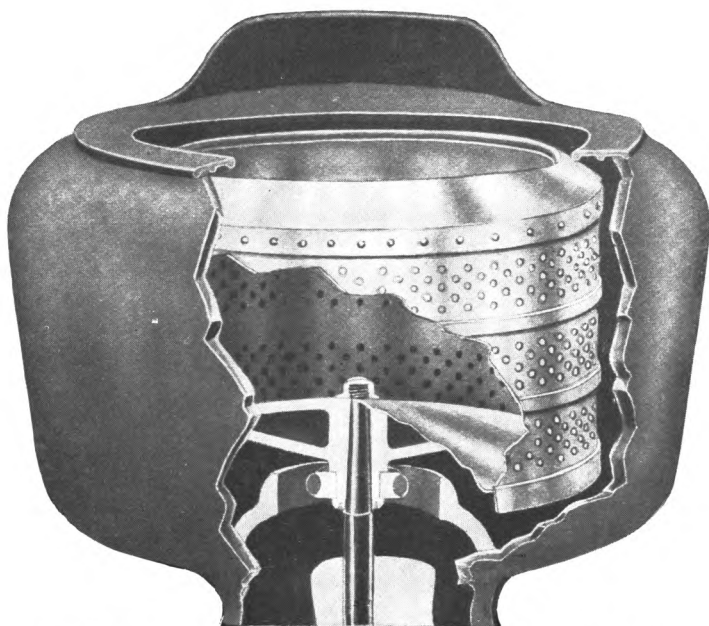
EXTRACTOR: SECTIONAL VIEW SHOWING INNER, PERFORATED, ROTARY TUB OR BASKET.
